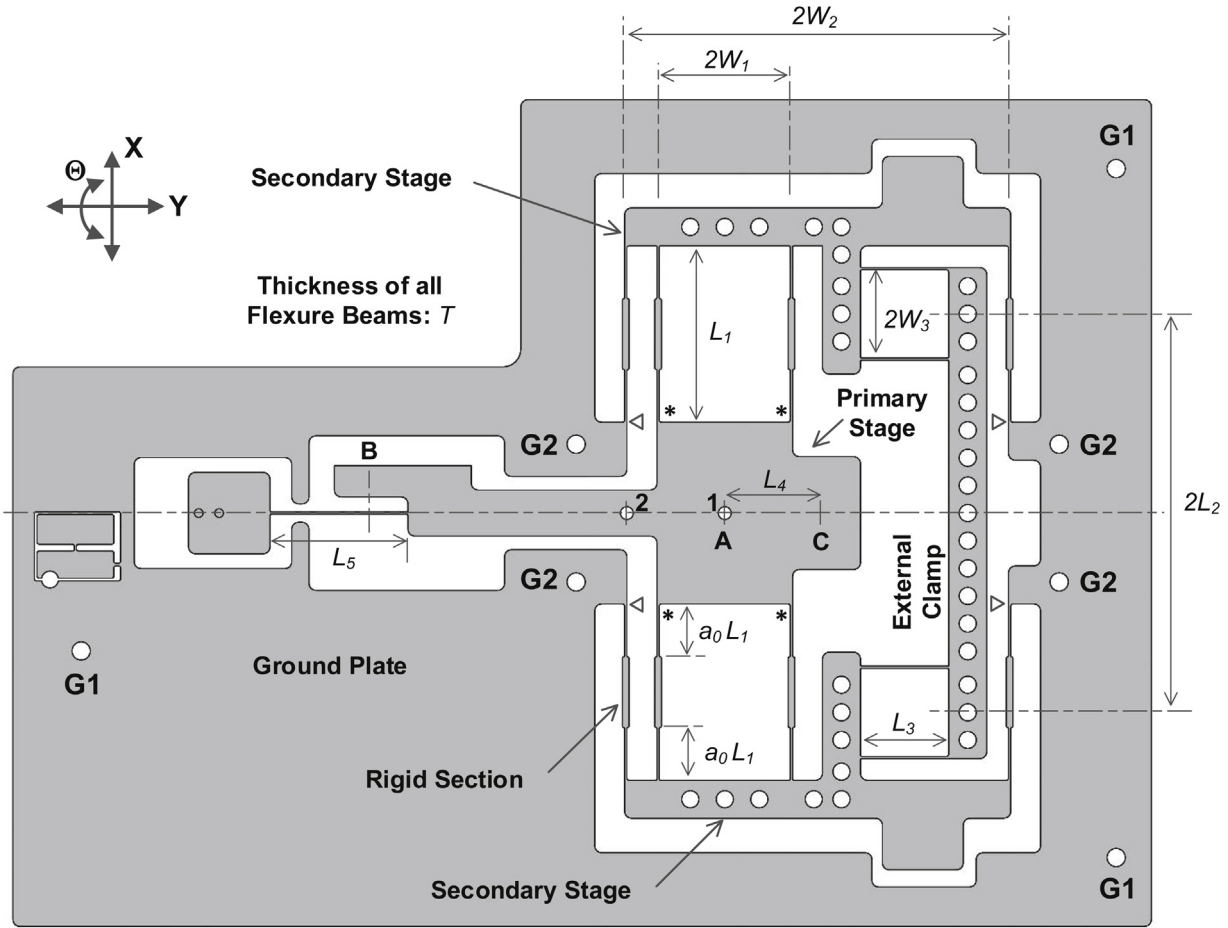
CAD Model of the CDPDP Flexure Mechanism.
